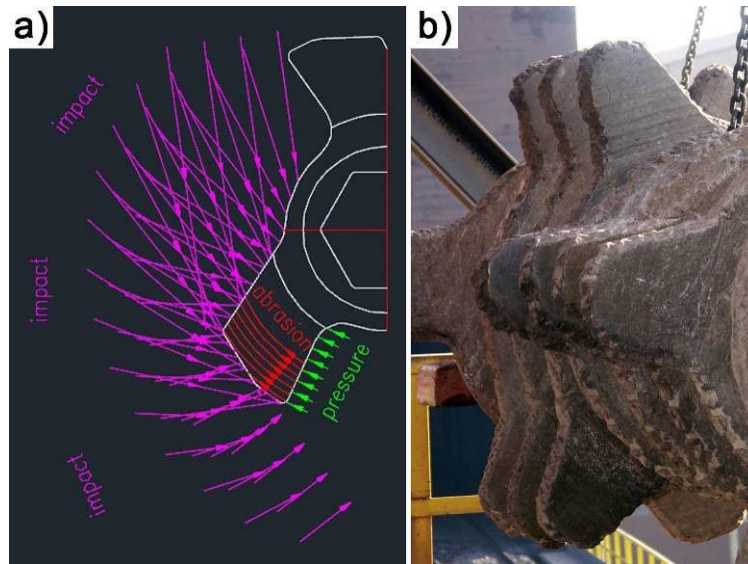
Sinter crusher: a) load zones [SHA14] b) worn section after prolonged use
